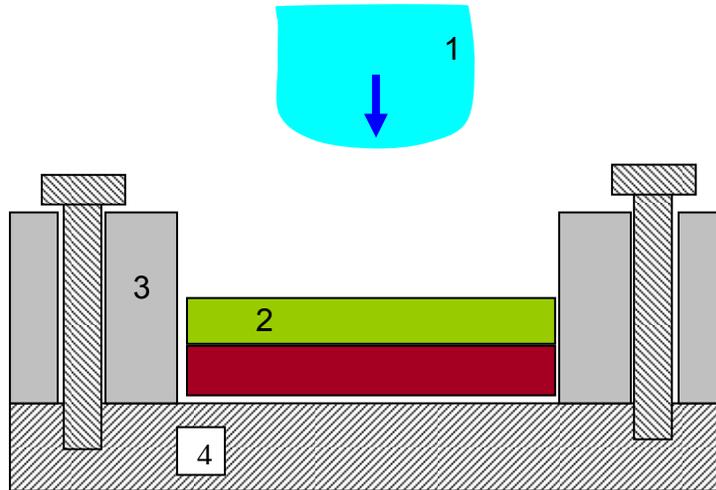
Schematic of nested experimental setup for welding. 1 –water projectile, 2 –nested metal samples to be welded, 3 – fasteners, 4 –back support
